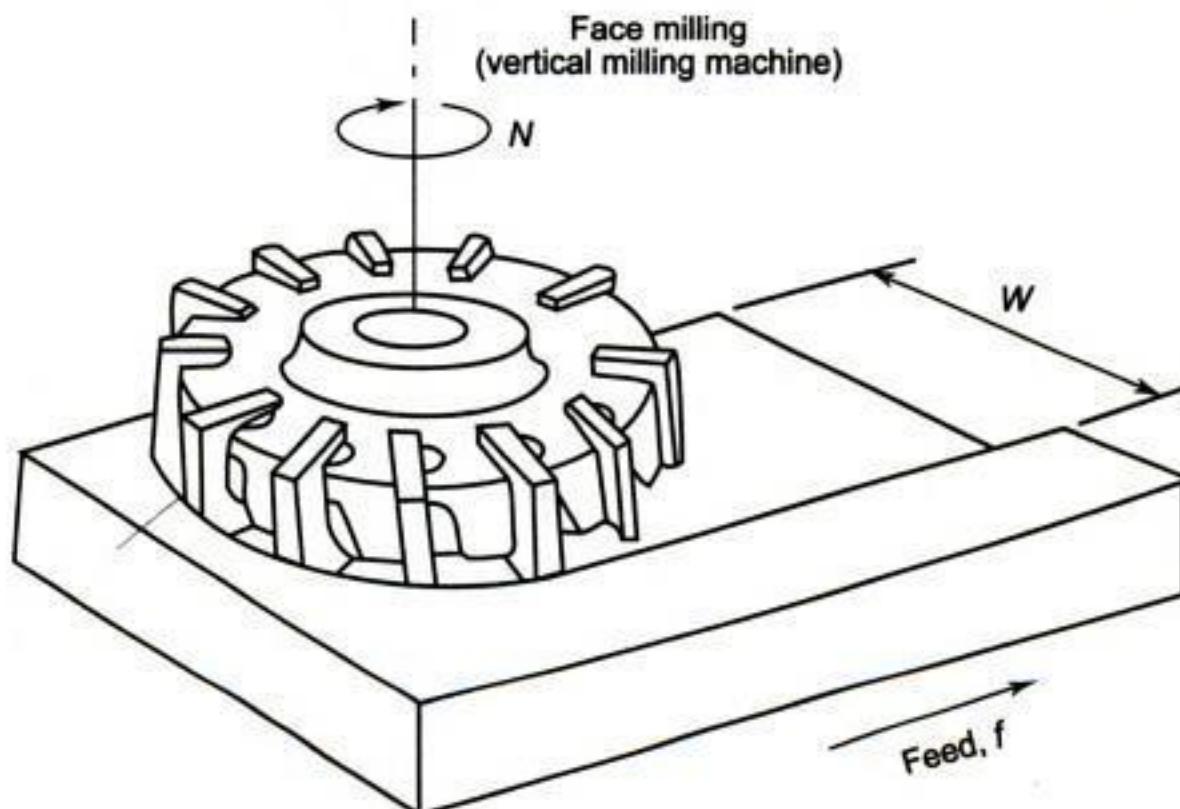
Multi-point cutting tool generating a plane surface.
